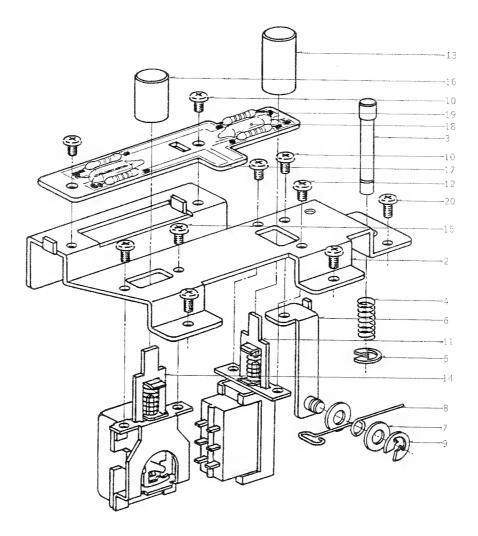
ILLUSTRATION OF IMPEDANCE ROLLER BLOCK
